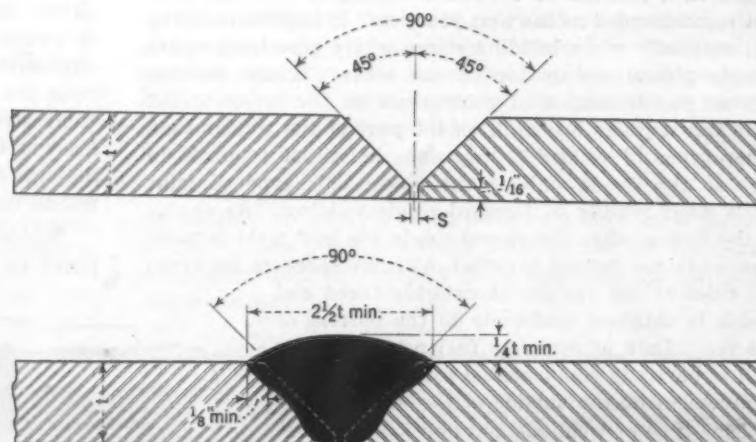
and 2—Single Vee Butt Joint, as Lined Up and After Welding
